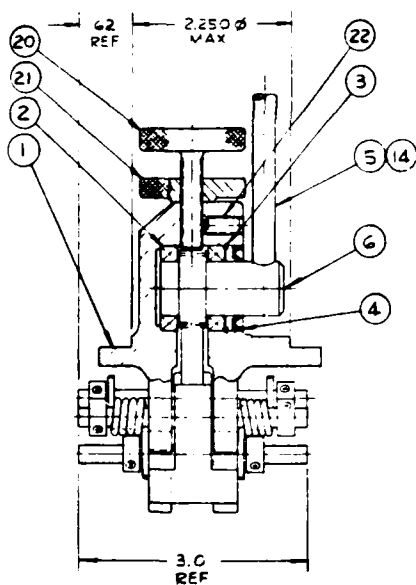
Enclosure Assembly (Sheet 3 of 3)
